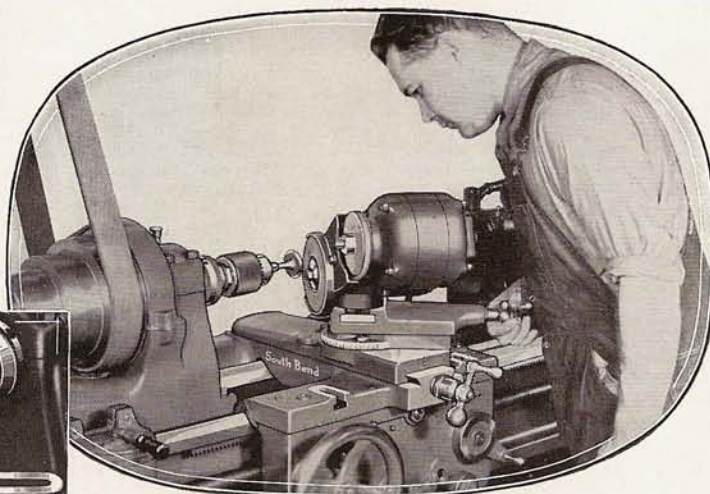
Grinding a Valve for an Automobile Engine in the 16-inch South Bend Lathe.
